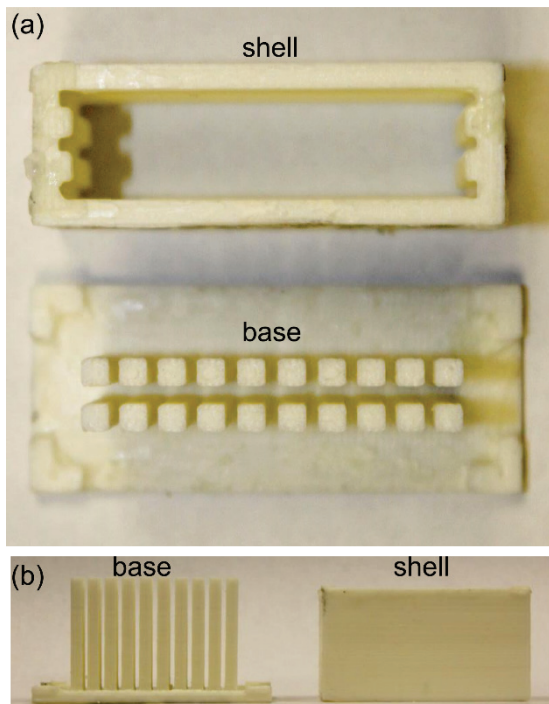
Base and shell components of the 3D printed mold for a metamaterial specimen with uniform beam thicknesses as fabricated. Mold components are shown in (a) top view and (b) side view.
